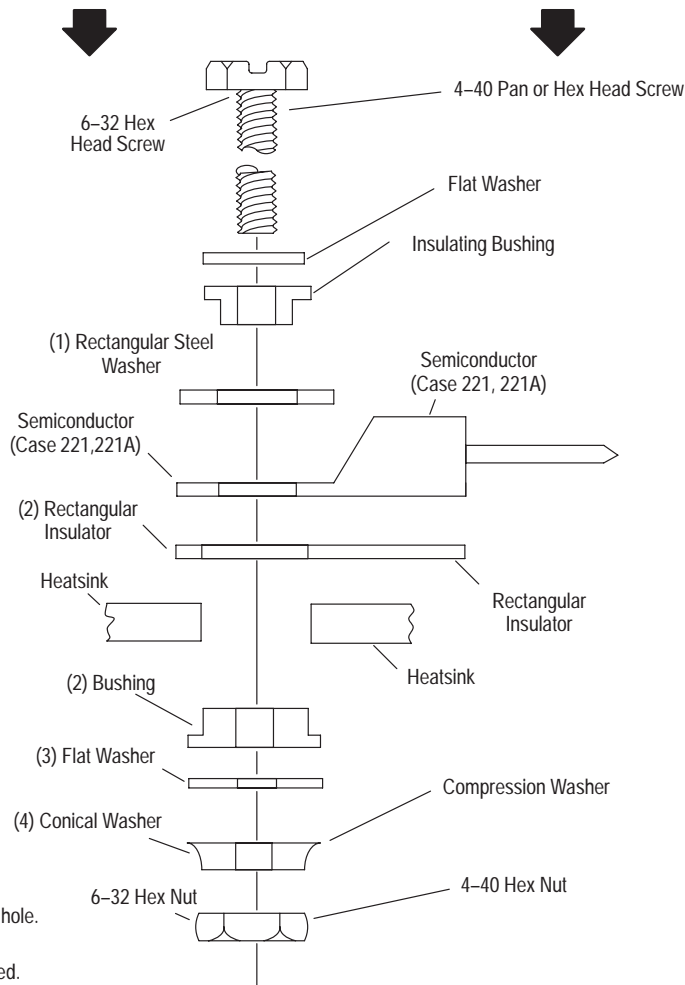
Mounting Arrangements for Tab Mount TO-220
